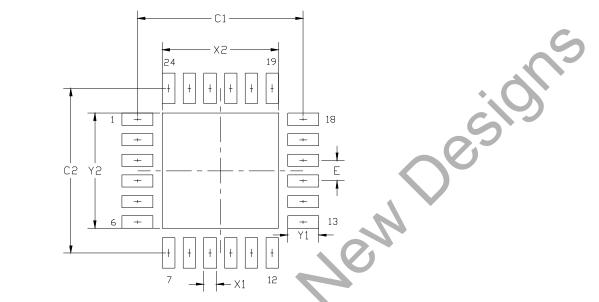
QFN-24 Recommended PCB Land Pattern
